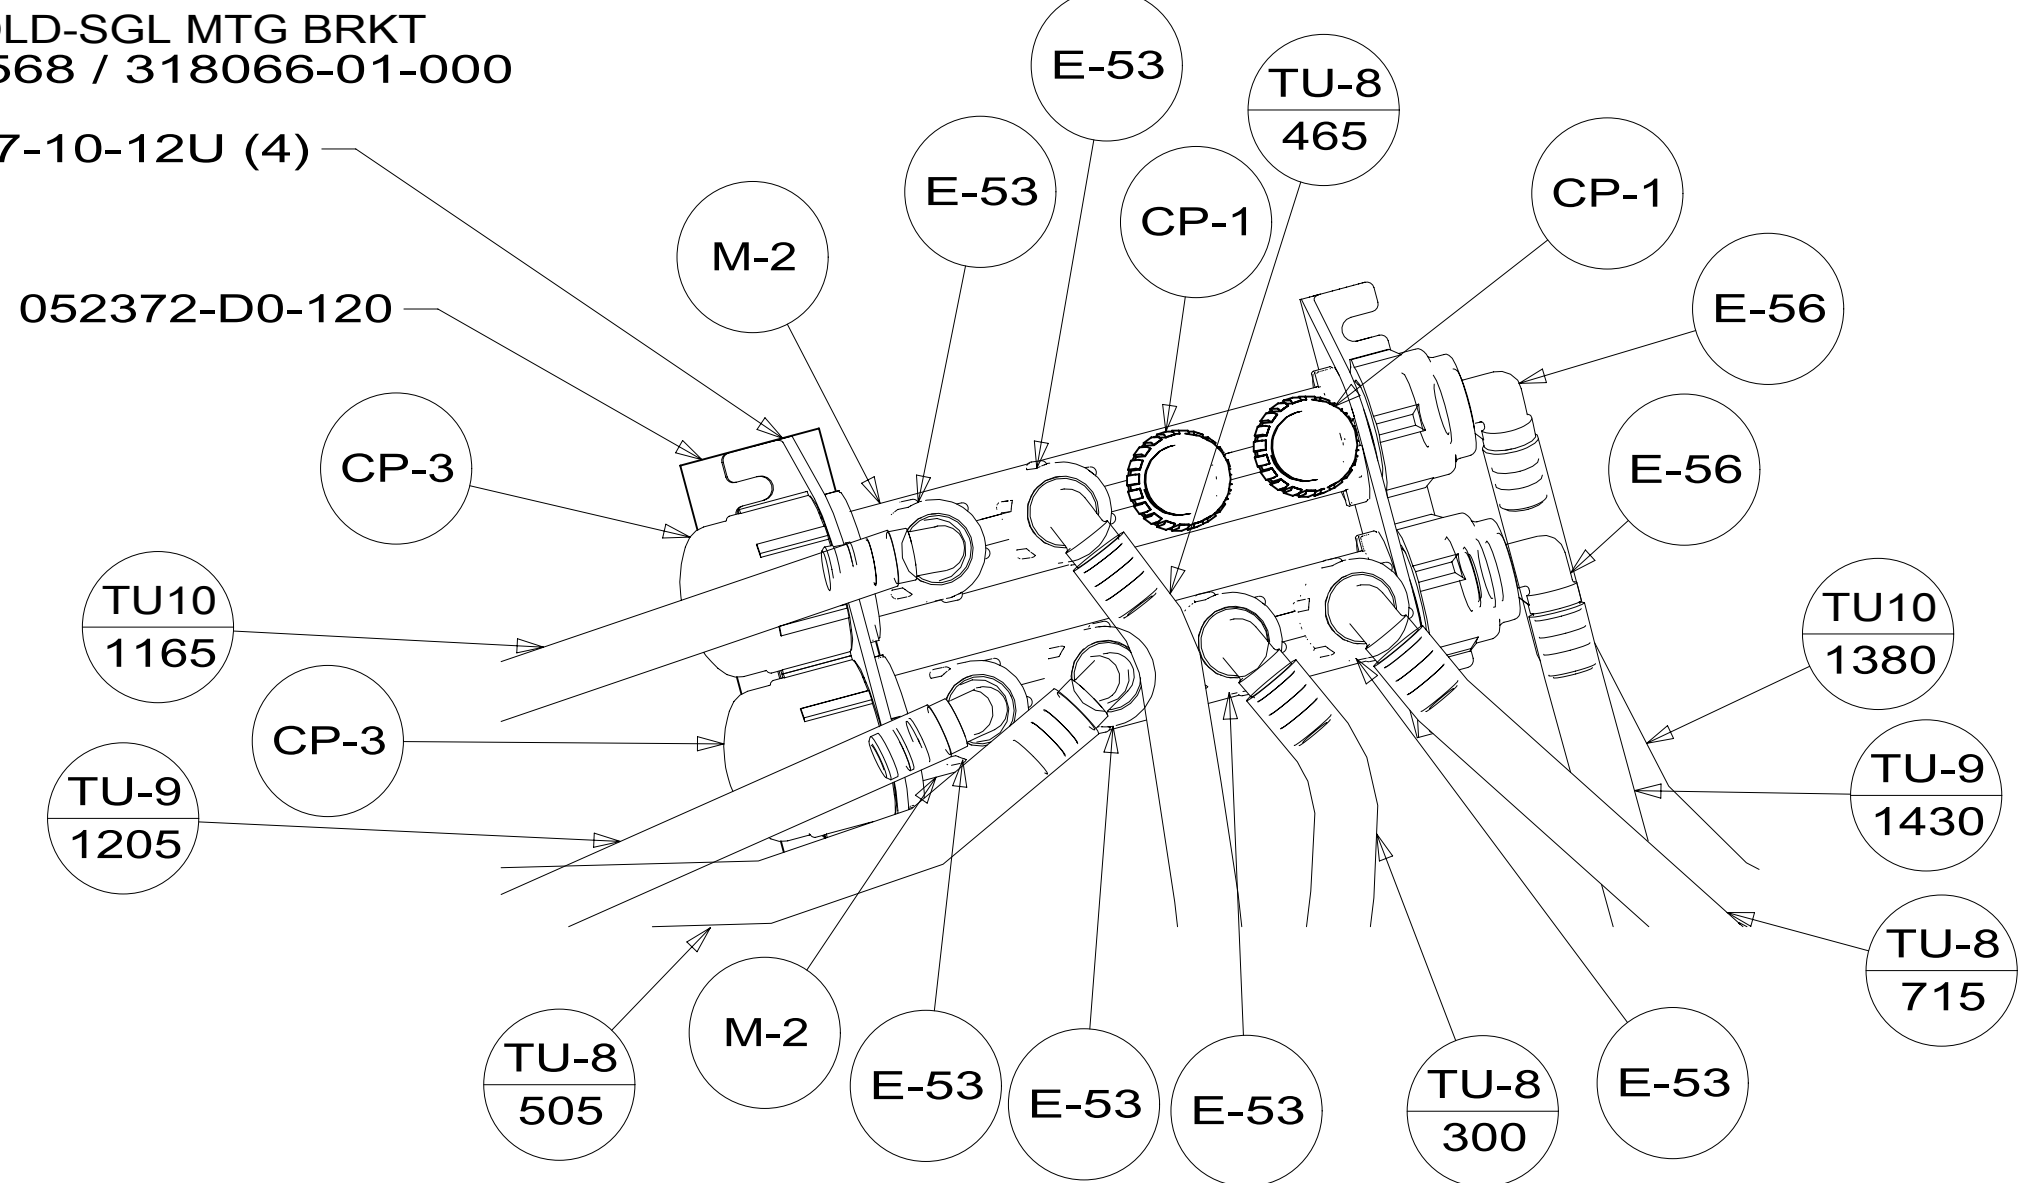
DETAIL CH (SHOWN W/O FLOOR & CABINETS)
